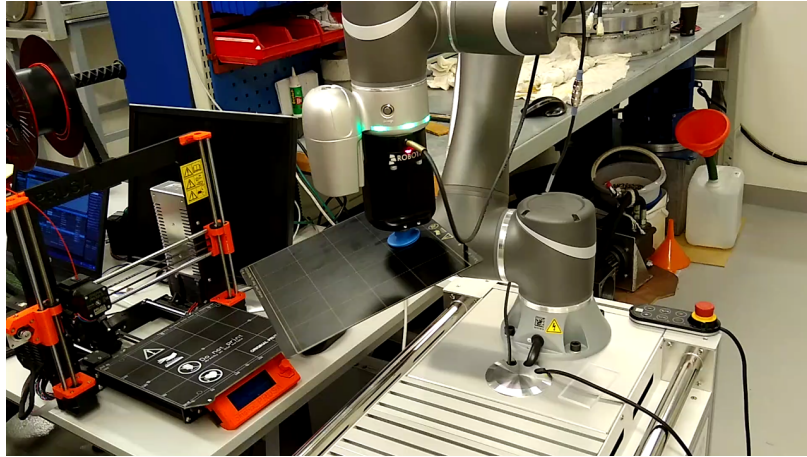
Lifting printing plate with vacuum gripper, first test
